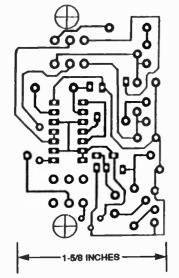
If you'd like to etch your own PC board for the Adapter, use this foil pattern.
